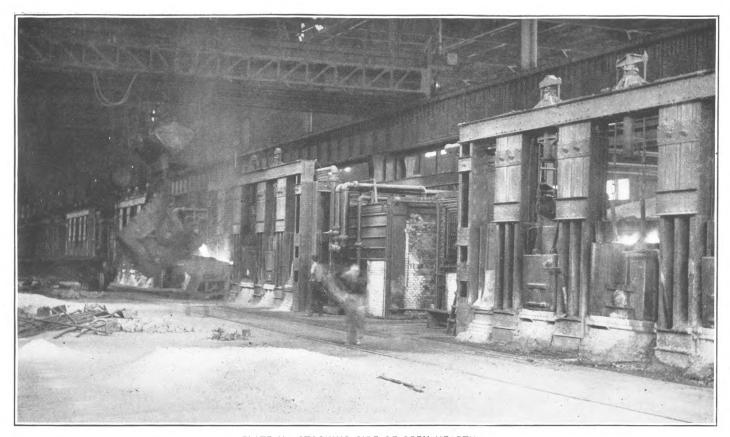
STOCKING SIDE OF OPEN HEARTH.
